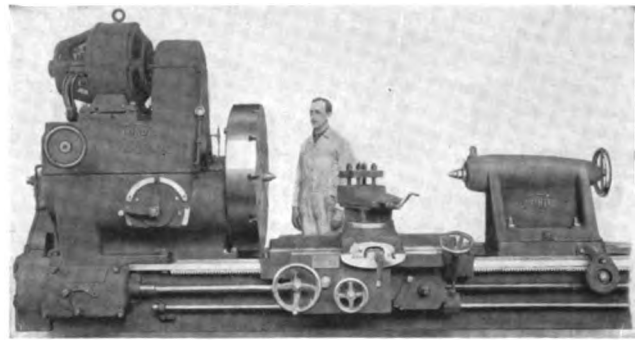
36-Inch (914 mm.) Standard Engine Lathe
